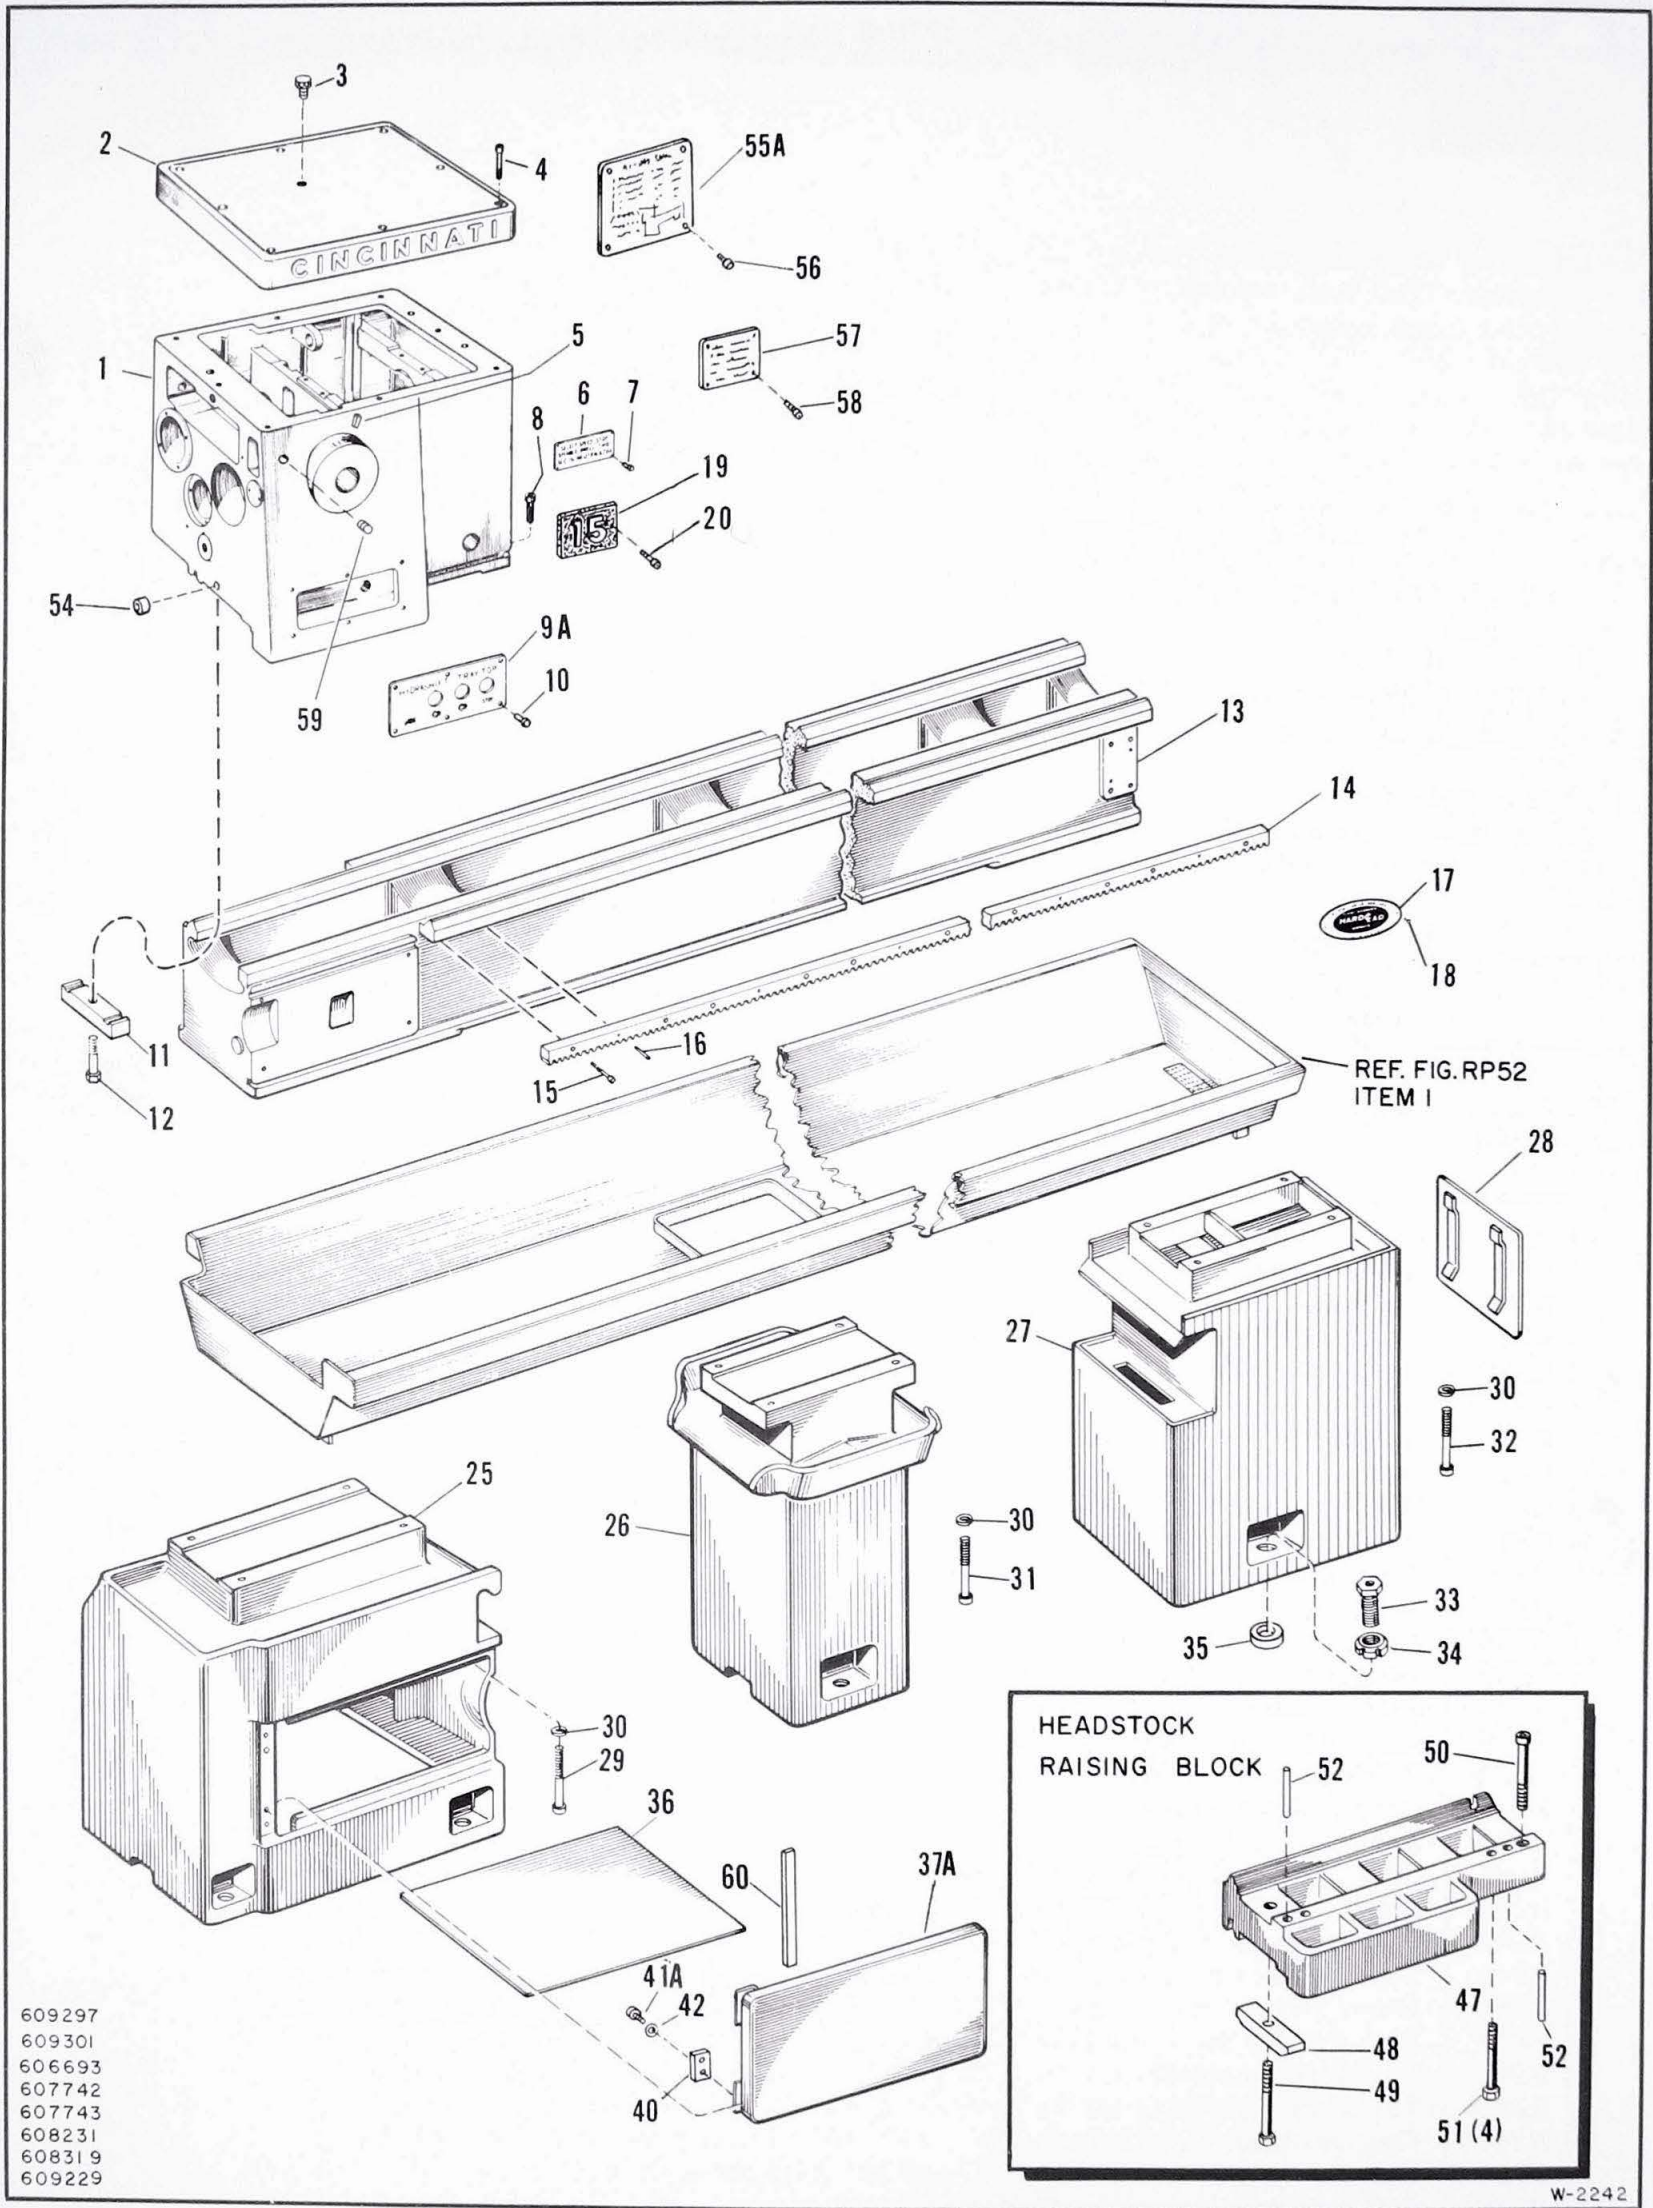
General Assembly for 10", 13", 15", 17" and 19" Lathes
